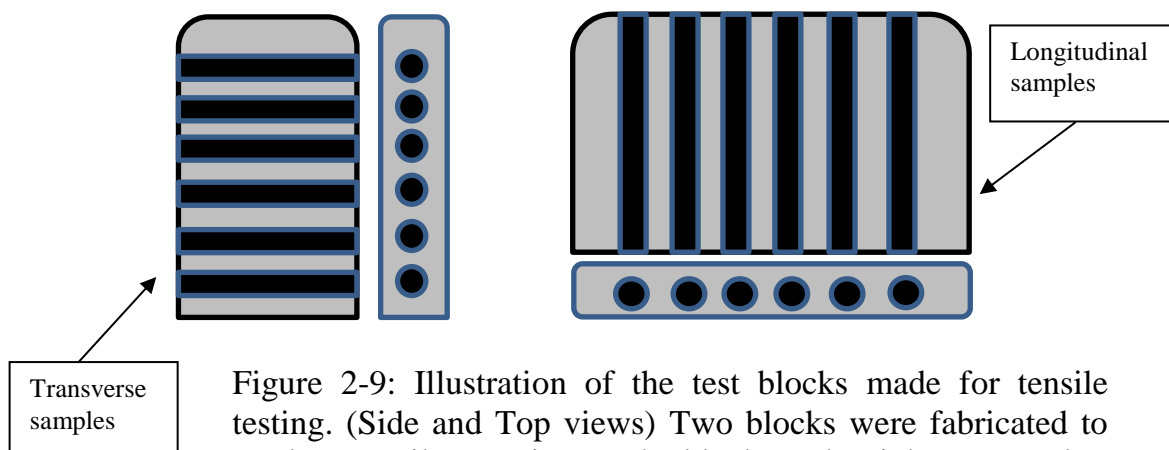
Illustration of the test blocks made for tensile testing. (Side and Top views) Two blocks were fabricated to produce tensile test pieces. The block on the right was used to extract vertical (longitudinal) test pieces and the block on the left was used for vertical (Transverse) test pieces. 8mm diameter test pieces were cut using wire-cut equipment.
